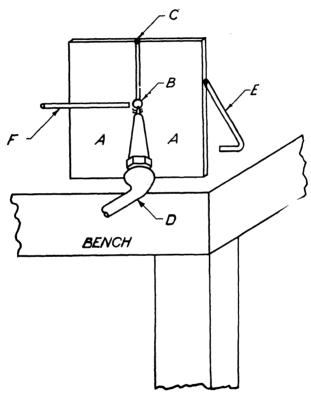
Vertical welding a butt weld: A. Parent metal, B. Puddle, C. Tack, D. Torch, E. Parent metal brace, F. Filler rod
